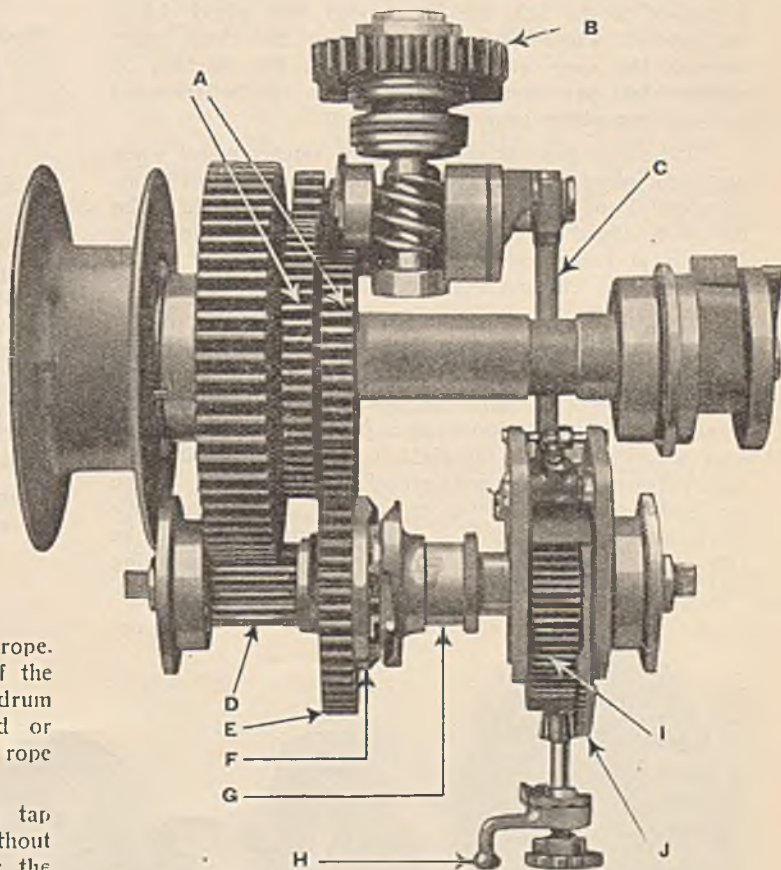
Plan of Moving Parts of Haulage: right-hand rope drum is removed to shew Hub and Pawl.
